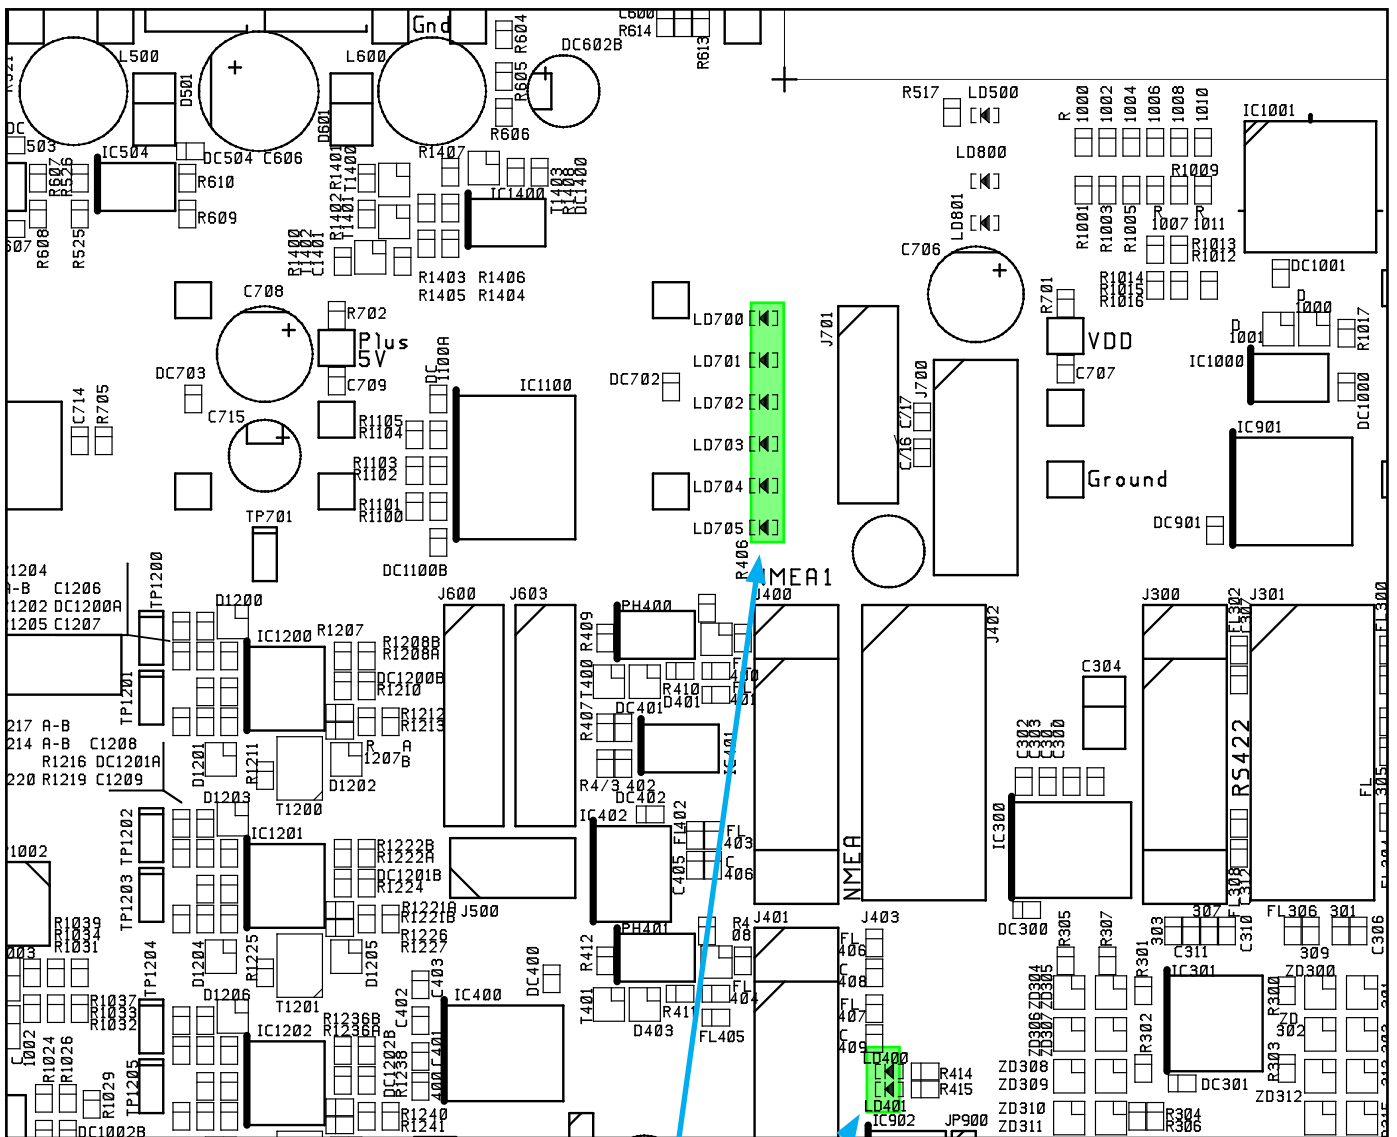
Back-up Battery Jumper, I/O Board.
